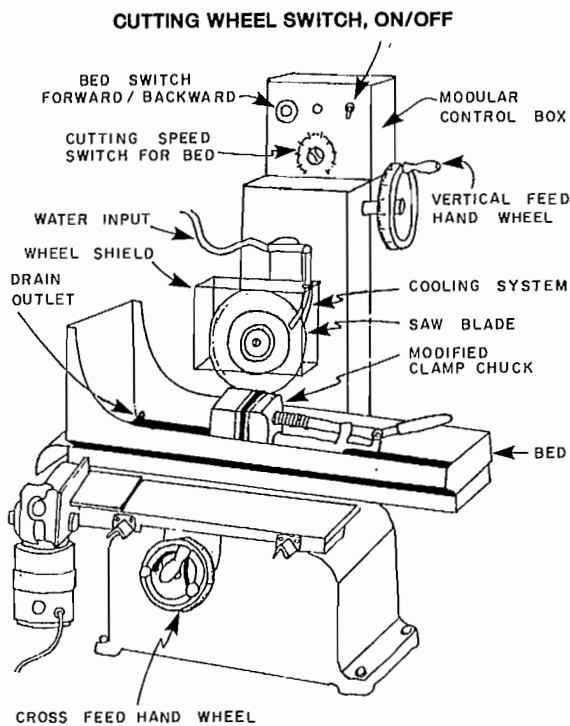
Drawing of a Bronwill sectioning machine showing the various parts in more detail.
